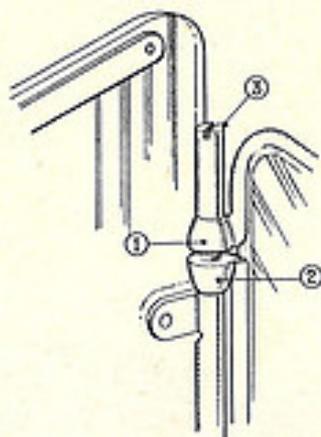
ENLARGED VIEW OF WINDOW FRAME GRIP
